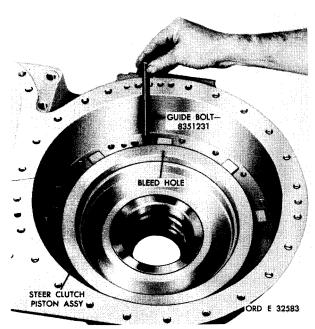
Installing guide bolt used to aline geared steer clutch and brake components
